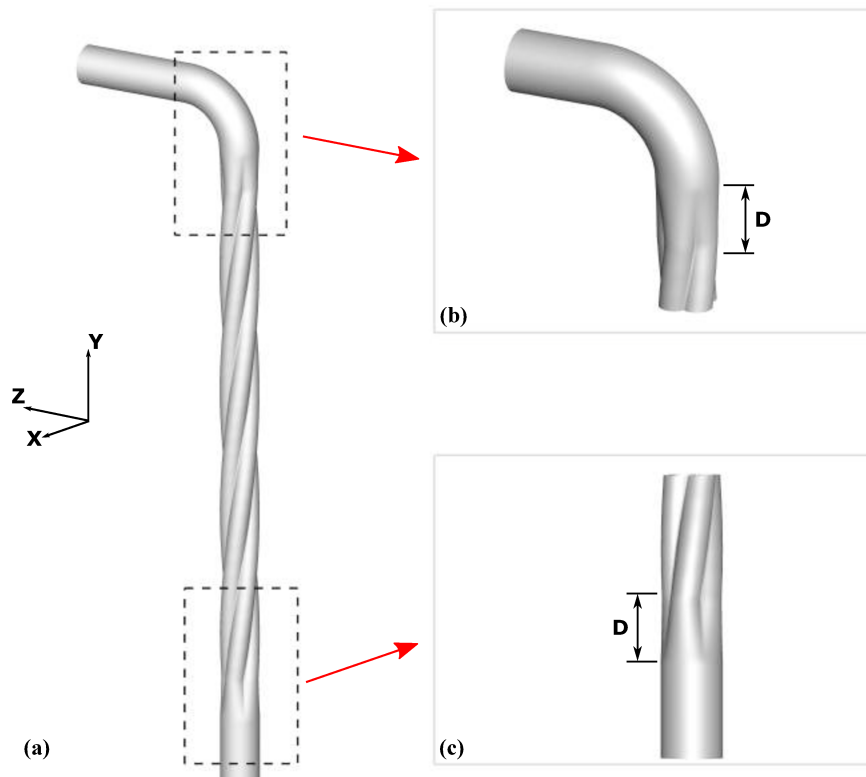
Schematic representation of the transition between the untwisted and twisted wall pipe.
